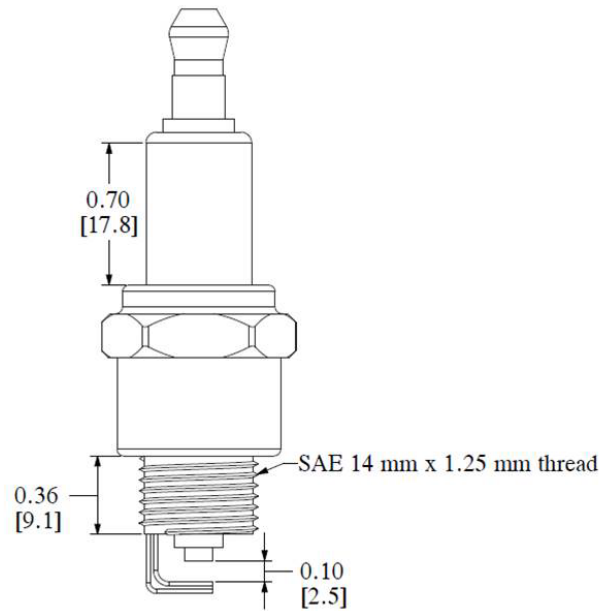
S-22. Dimensioned Drawing of a Spark Plug
